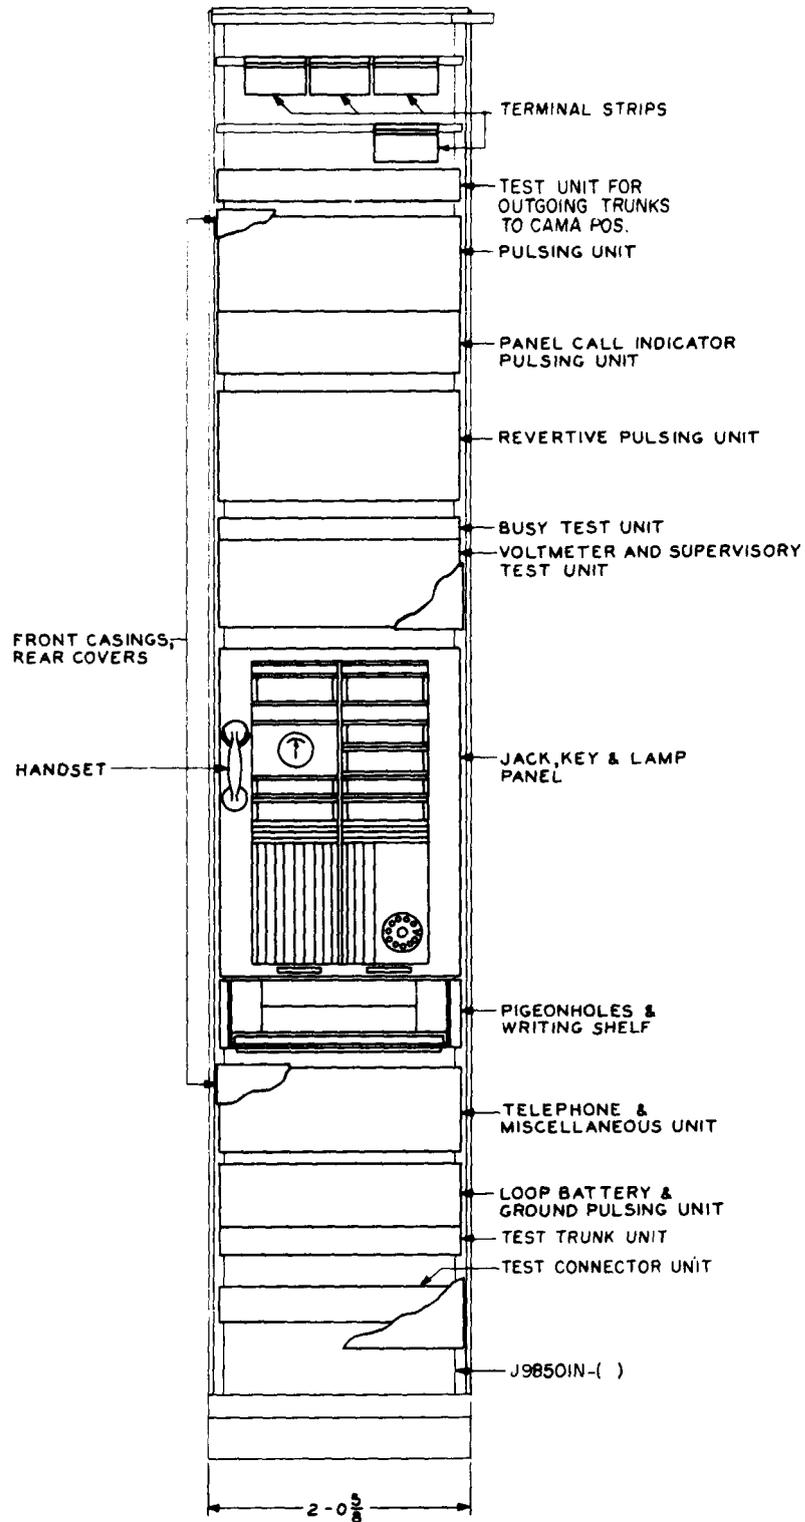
Manual Outgoing Toll Connecting Trunk Test Frame
